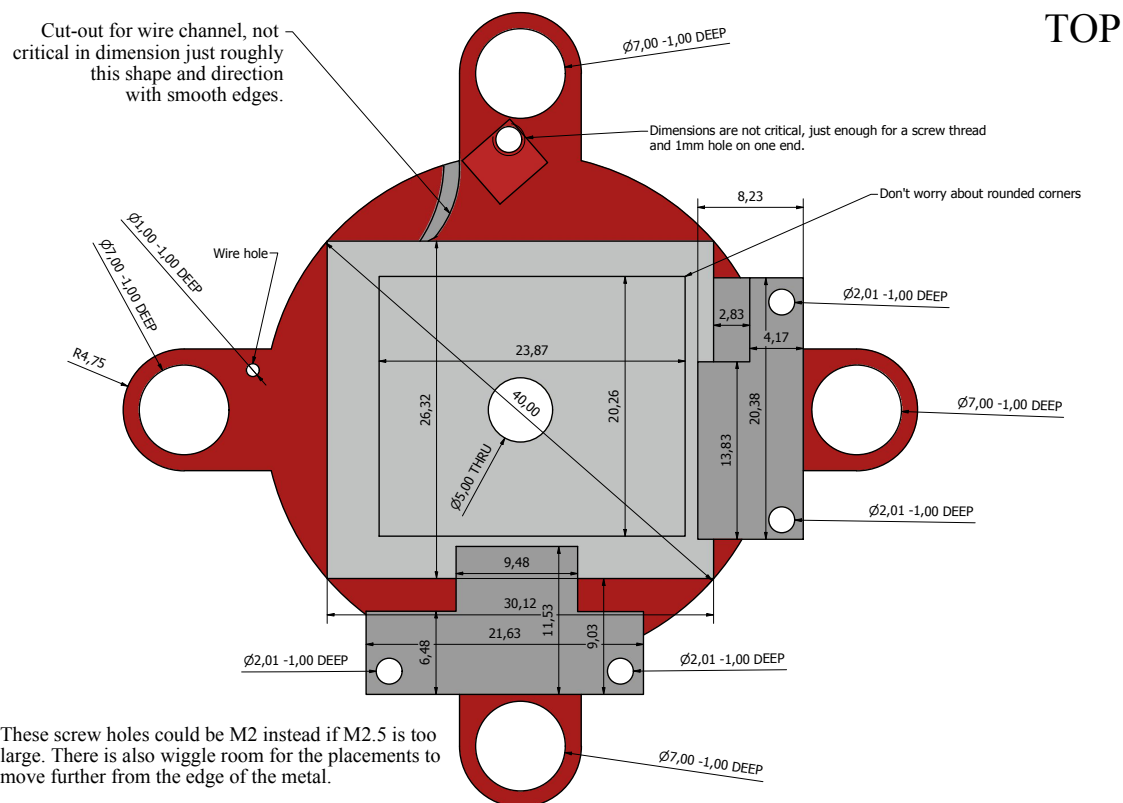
Design schematic of the lower coil former and mounting mechanism.
